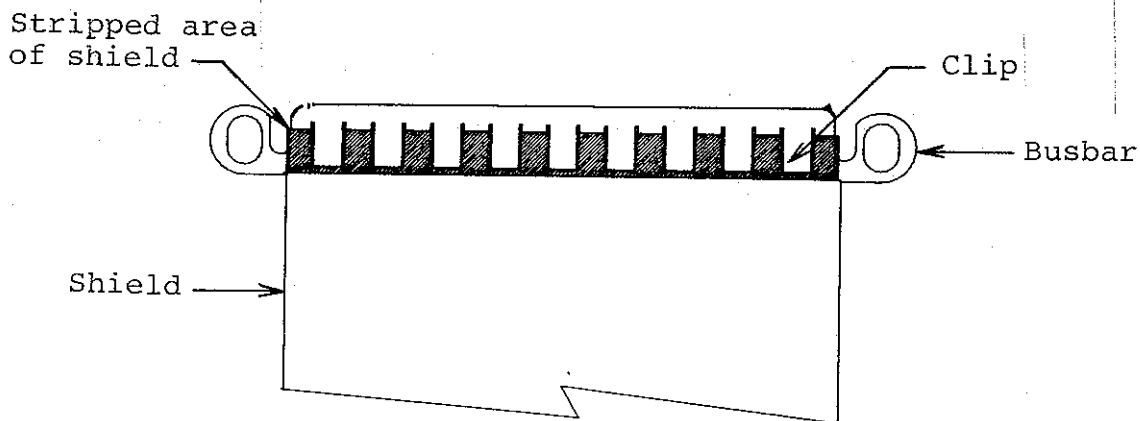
Inserting Prepared Inter-Layer Shield into Clips of Busbar
